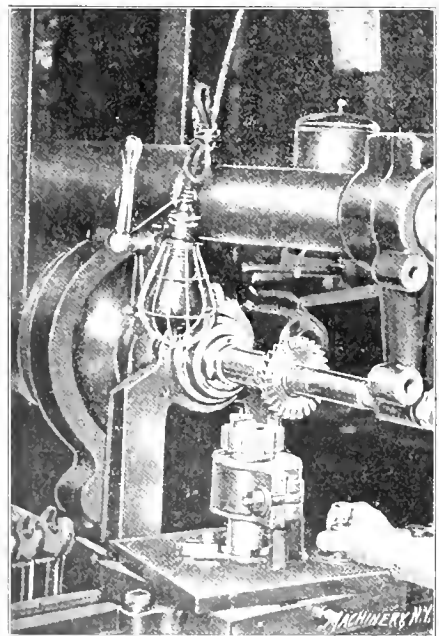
Milling Clutch Teeth in Gear-clutch End of a Drive-gear Sleeve
